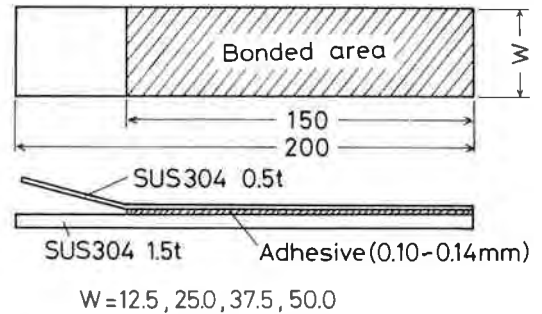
Shape and dimension(mm) of the specimen for peel strength.
